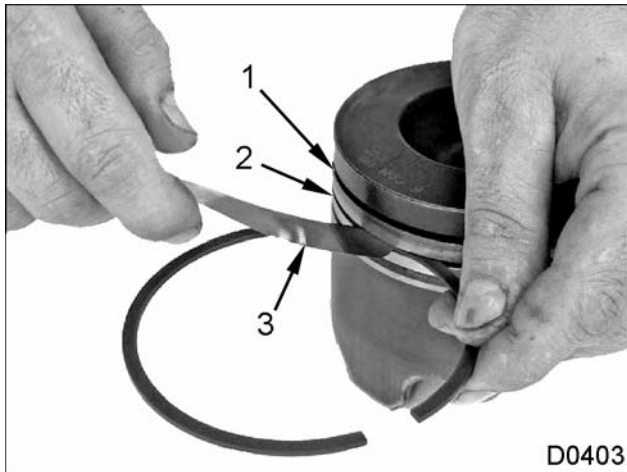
Ring groove clearance measurement (intermediate ring shown)
